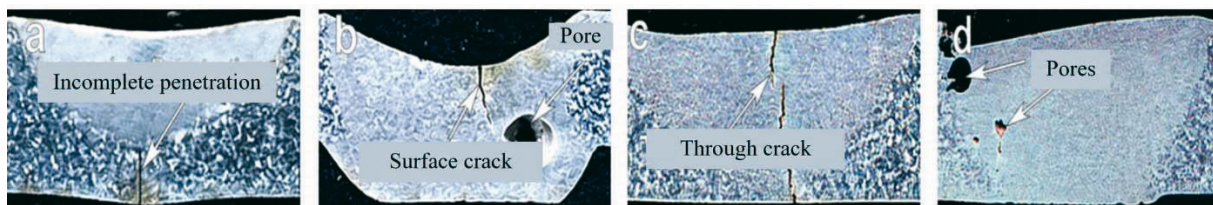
Macrostructure of welding trials conducted to establish the welding limit
